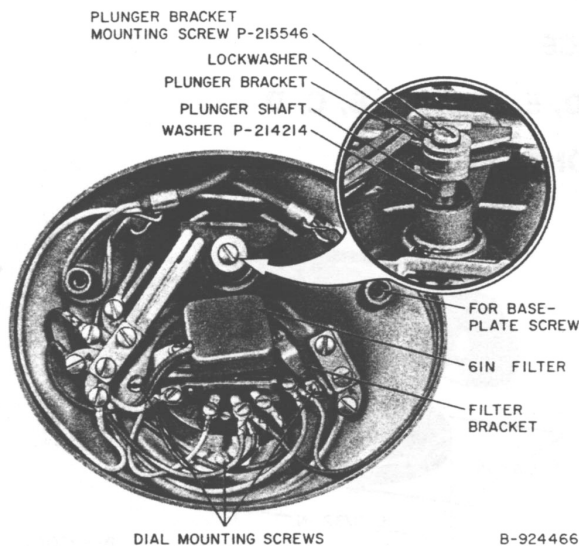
Assembly of Filter on D-Type Handset Mounting (Dial)
